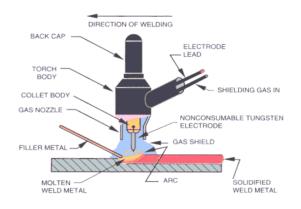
Schematic of GTAW Technique (http://www.spectroweldinstitute.com)
